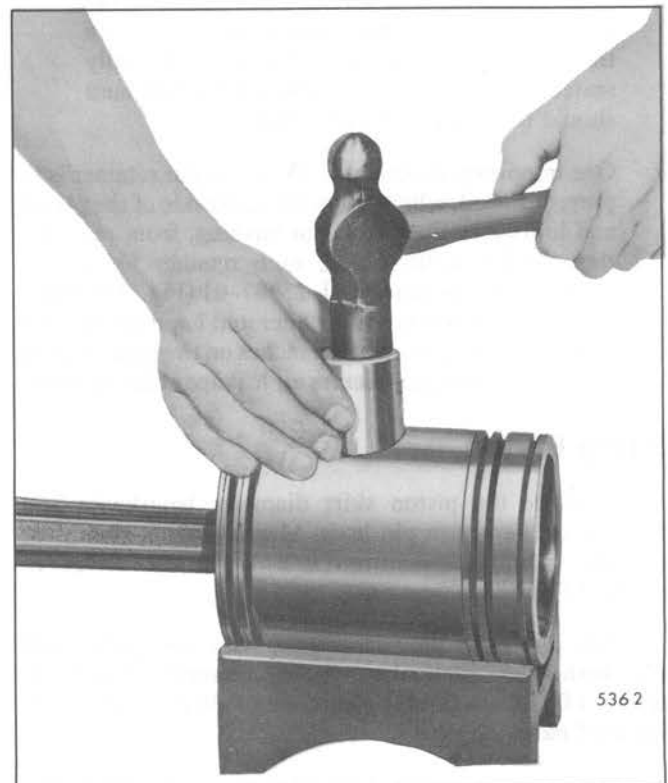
Installing Piston Pin Retainer with Tool J 23762-A
